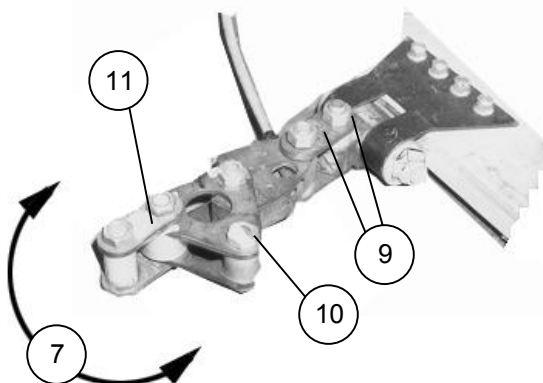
Latch assembly bolted to type V platform extraction bracket
